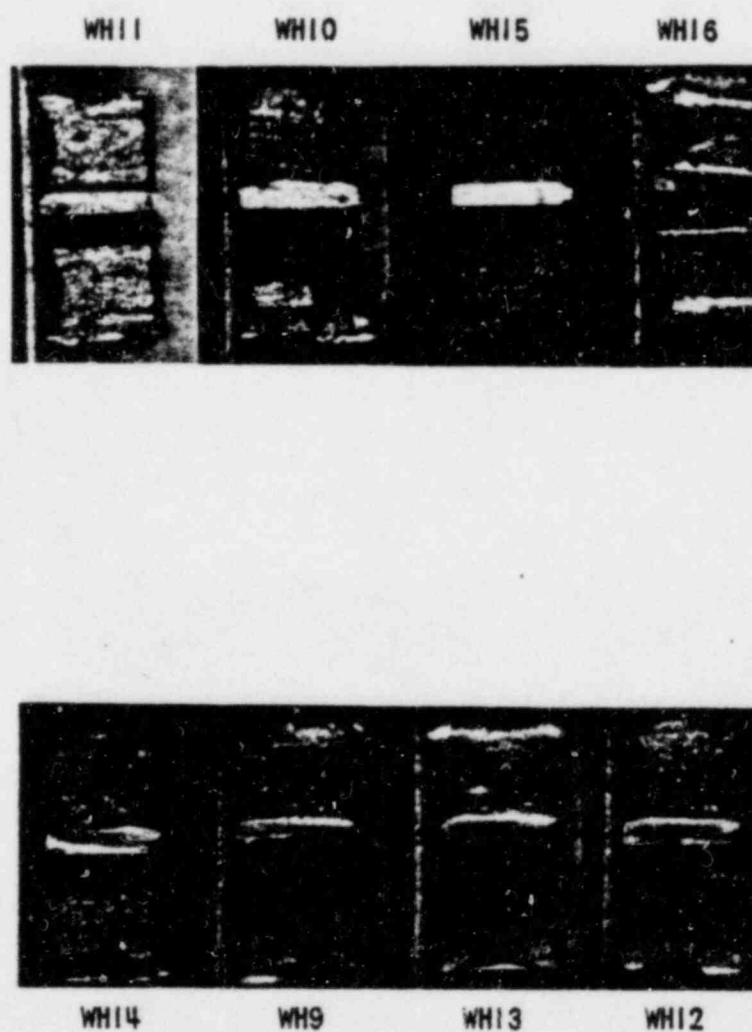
Charpy Impact Specimen Fracture Surfaces for Point Beach Unit No. 1 Weld-Heat-Affected-Zone Metal
